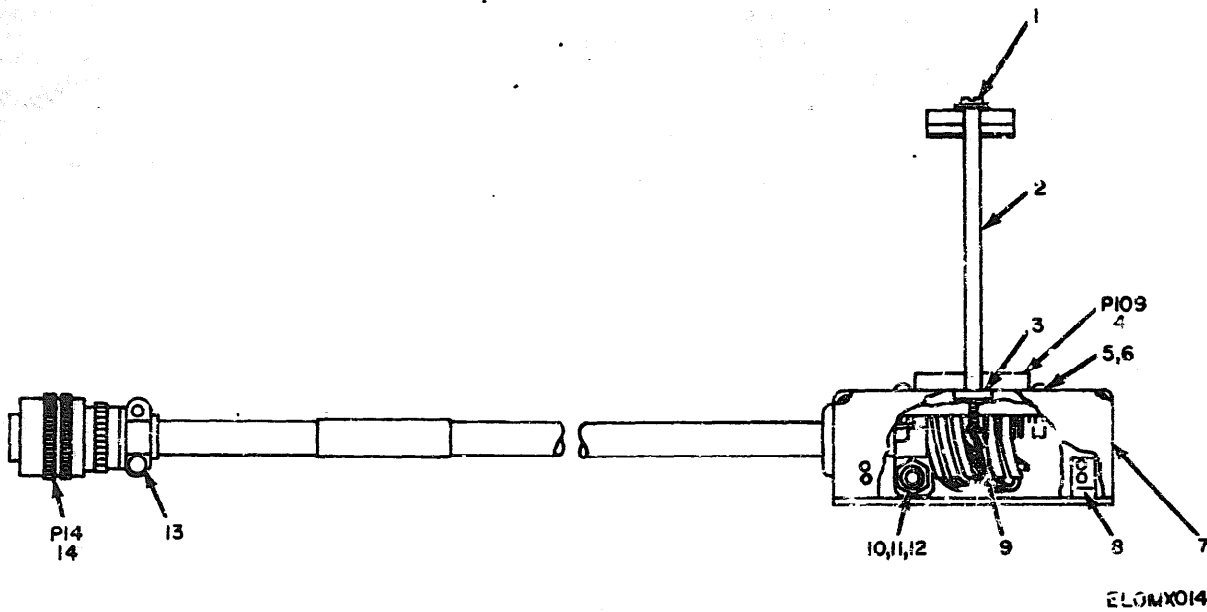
Cable Assembly, Special Purpose, Electrical, CX-7572/ASM-63
